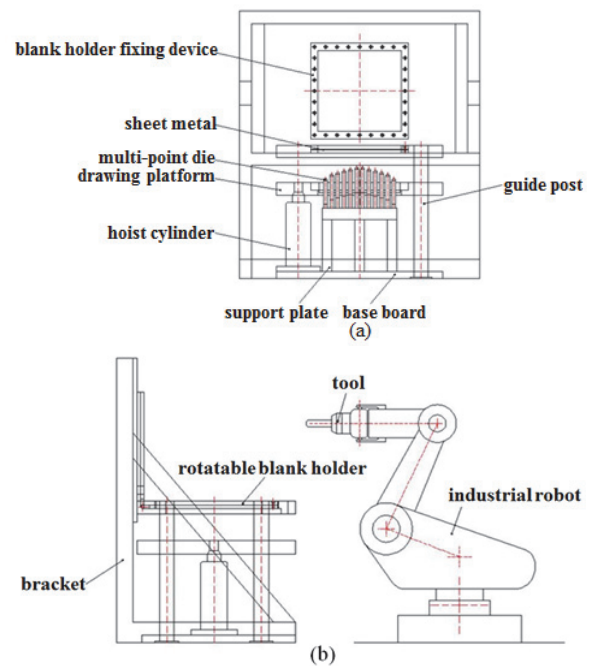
Hybrid forming equipment: (a) Multi-point forming structure; (b) Incremental sheet forming structure
